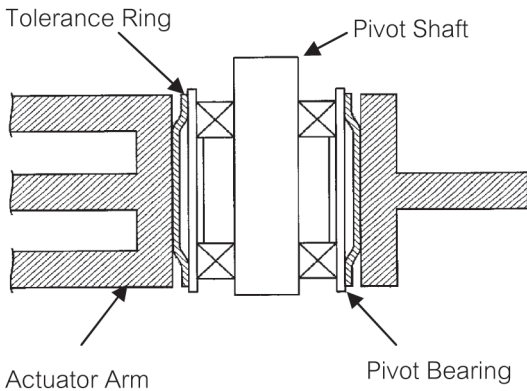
The Pivot Bearing Assembly Using Tolerance Ring
